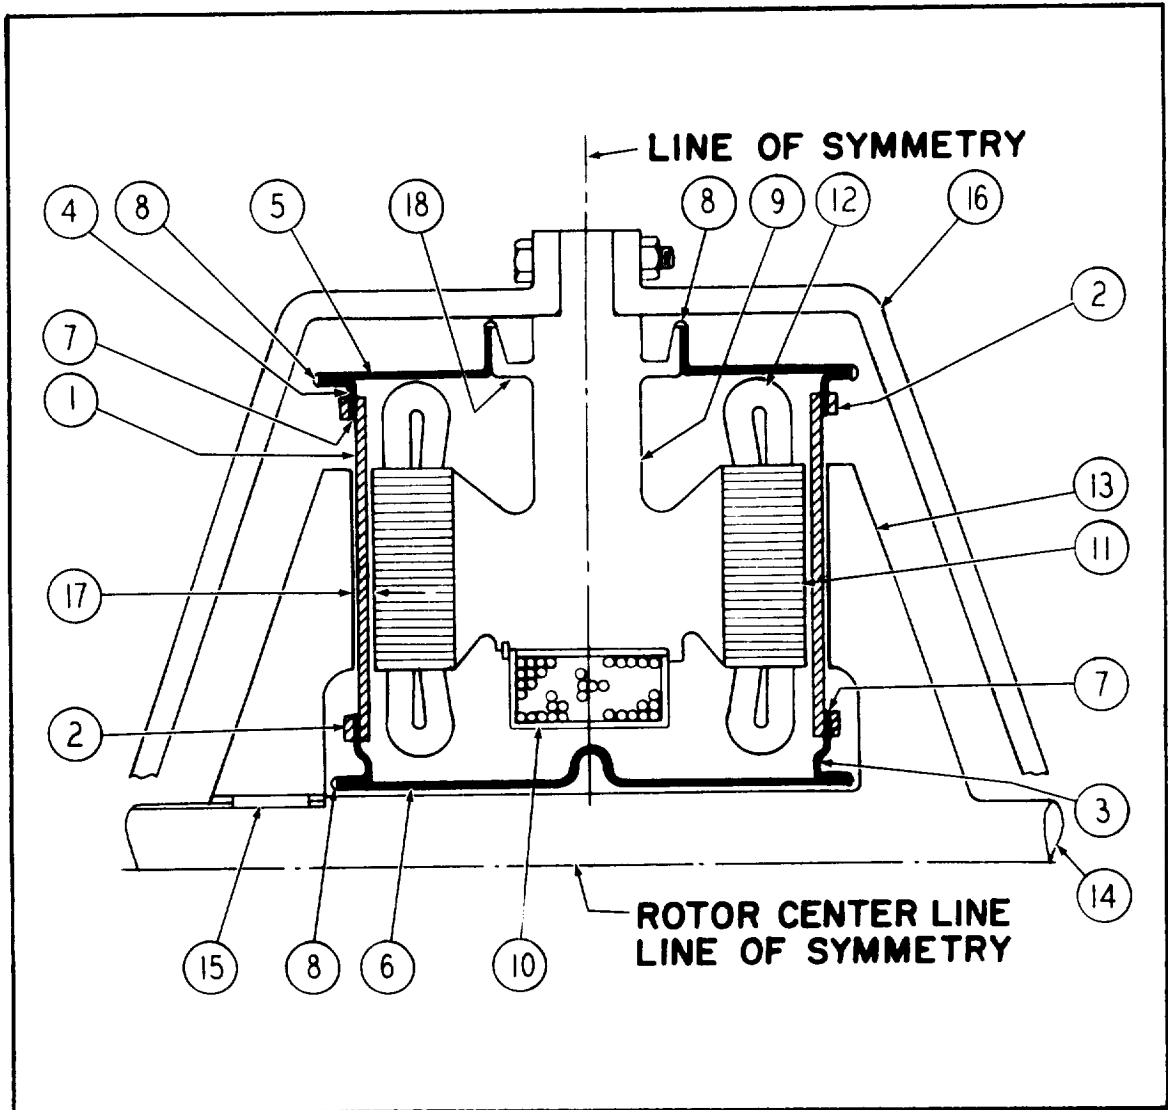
Bore Seal Assembly, Axial Gap Inductor Generator
